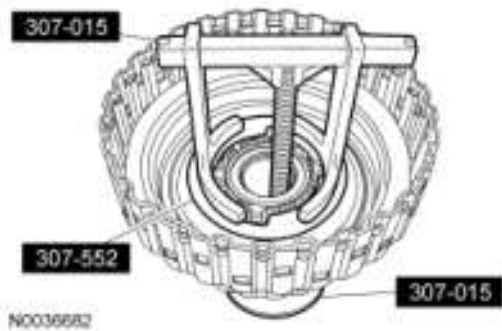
Installing Special Tools (307-015, 307-552) Onto Direct Clutch Assembly
